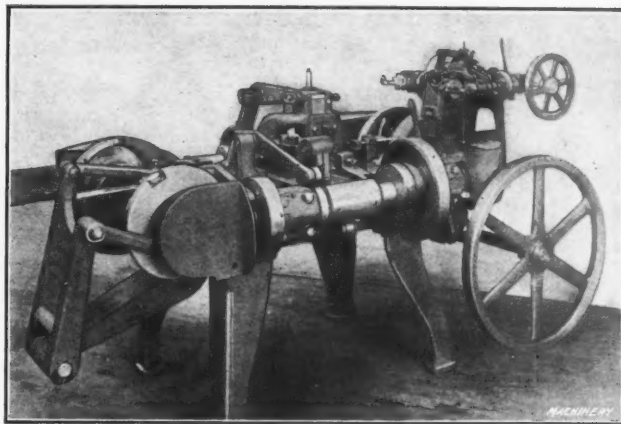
Comparison of Sizes of Wire-forming Machines—a No. 00 standing on the Gear Guards of a No. 5
